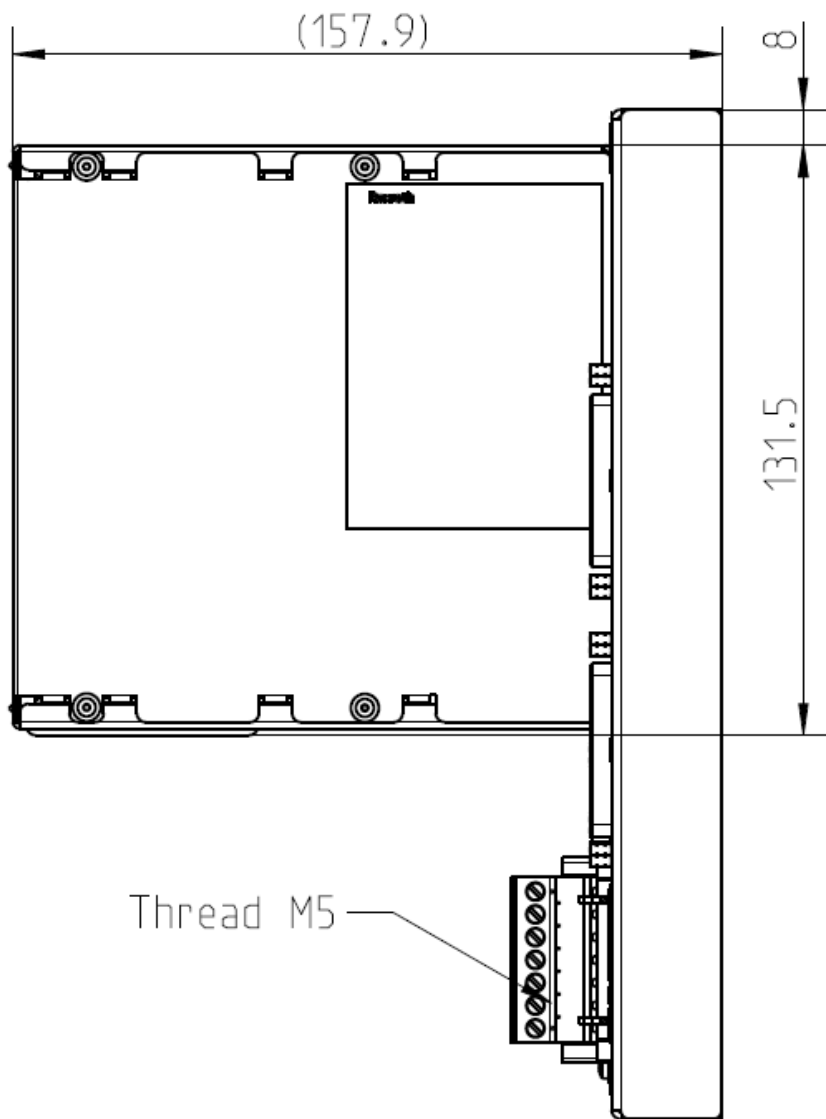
Dimensions (side view) of the NYS04.2-ST-01-ULNN-NY4013
